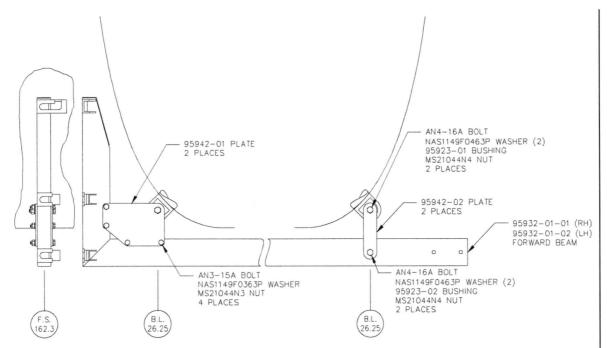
Forward Beam Removal / Installation – S/N 57081 & sub. Looking Aft, Right Hand Installation Shown
